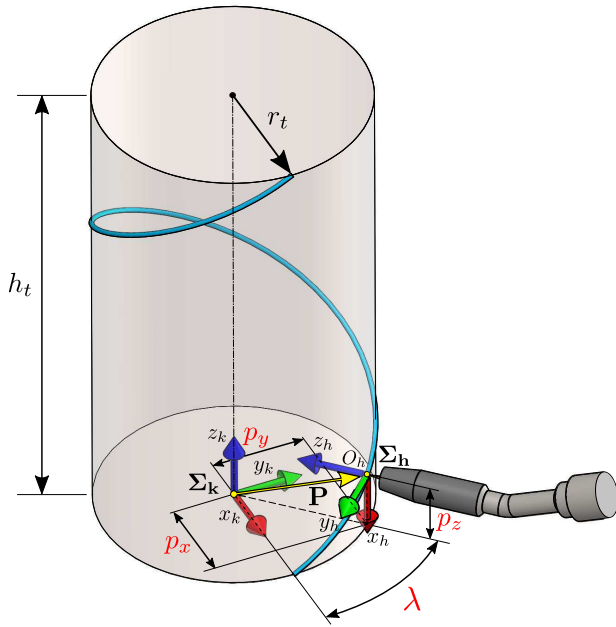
Desired tool path and orientation for the welding task.
